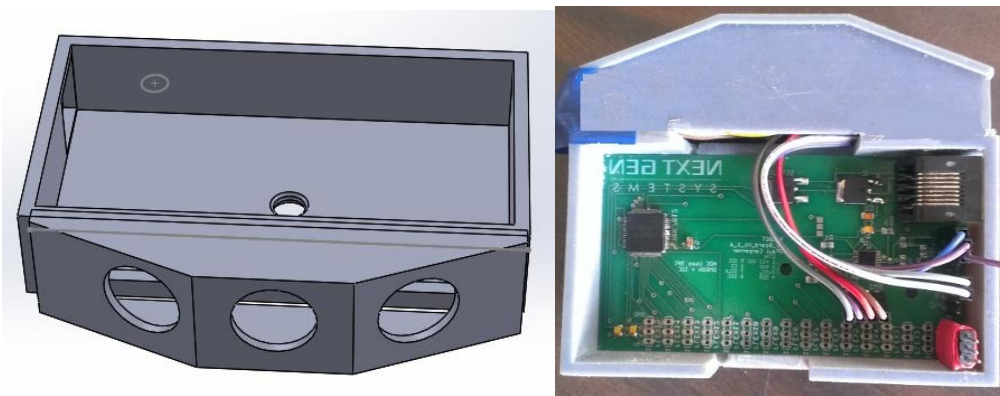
CAD drawing of final housing(left) and final 3D printed housing with sensors and boards fitted.(right)
